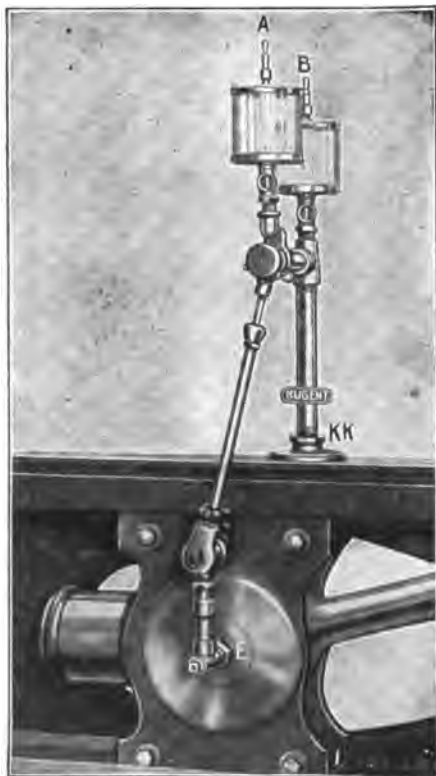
SEC. 7e.—Cross-head pin and top guide oiler.
